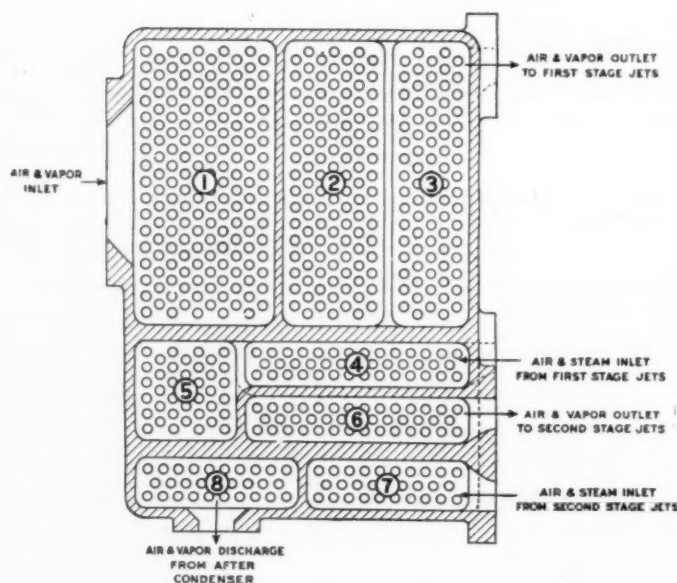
ARRANGEMENT OF AIR DEVAPORIZER OR COOLER, TOGETHER WITH STEAM JETS, INTERCONDENSER, AND AFTERCONDENSER IN INGERSOLL-RAND COOLER DESIGN
